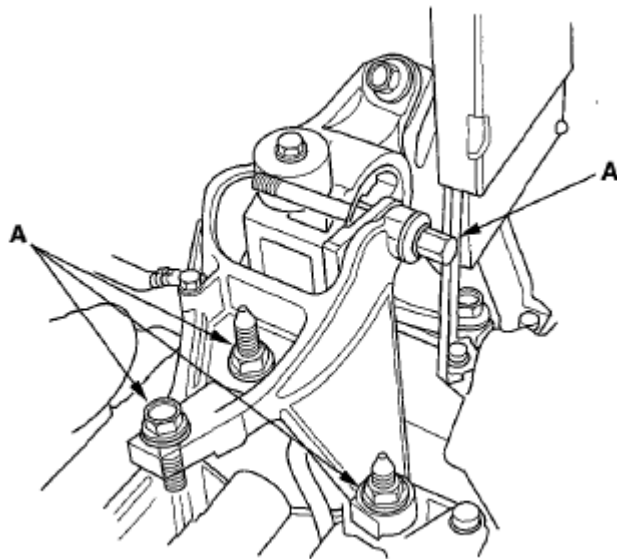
Identifying Transmission Mount Bracket Mounting Bolts & Nuts - A/T Model
